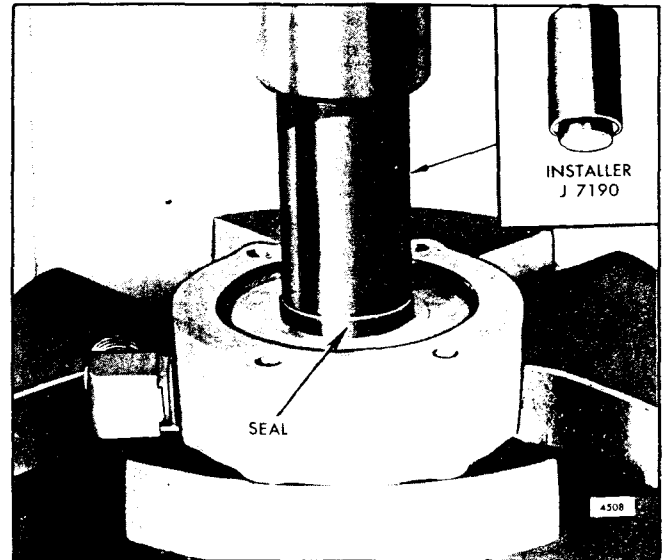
Installing Hydrostarter Shaft Seal in Valve Plate
